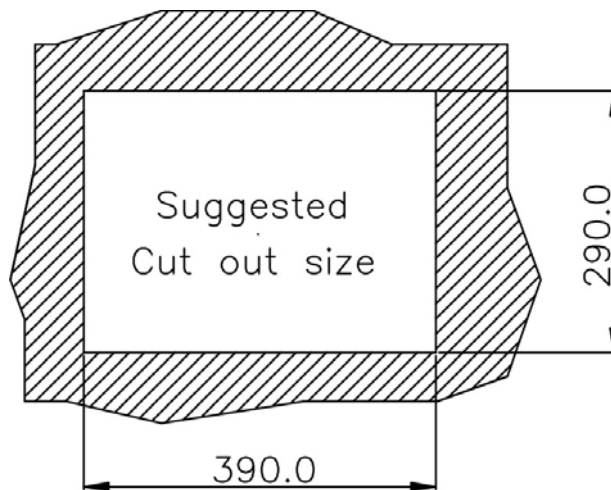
Suggested Panel Cut Out Size for PPC-5152-D525-E (Unit: mm)
